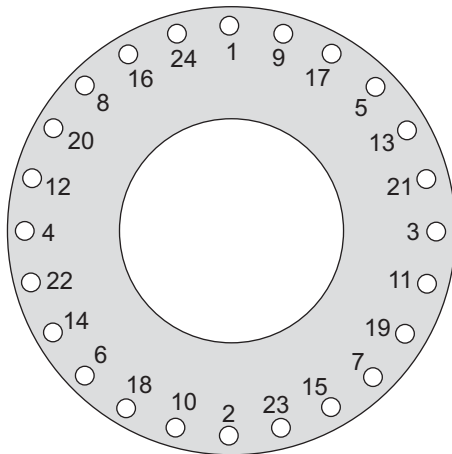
Tighten bolts diagonally / 24 bolts, spacing 15°
